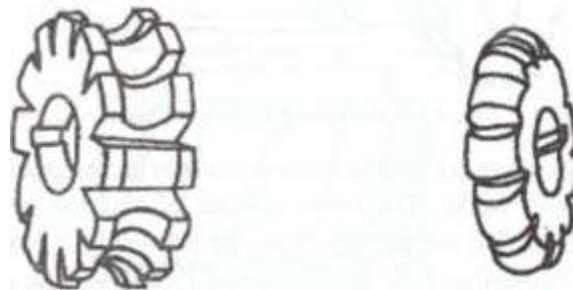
Concave cutter Fig. 1.40: Convex cutter
